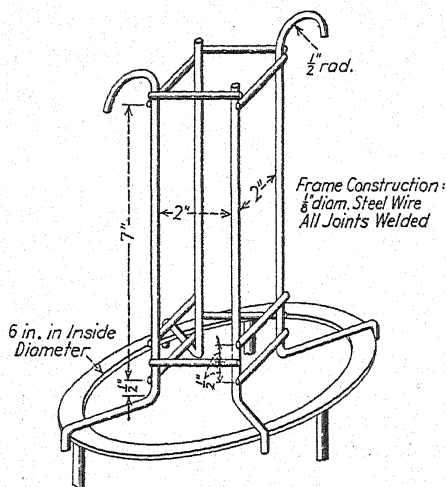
Wire Frame and Ring Stand for Supporting Crib Specimen.
